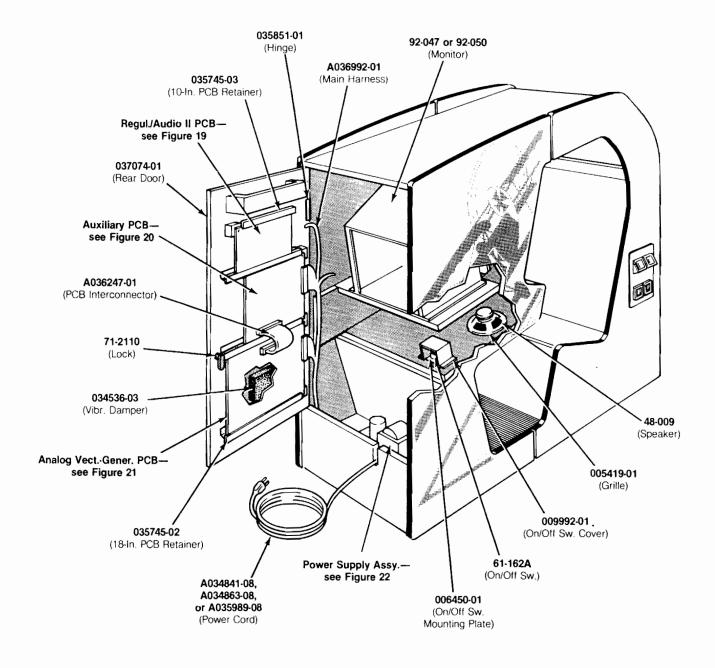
Cabinet-Mounted Assemblies A037051-xx B
